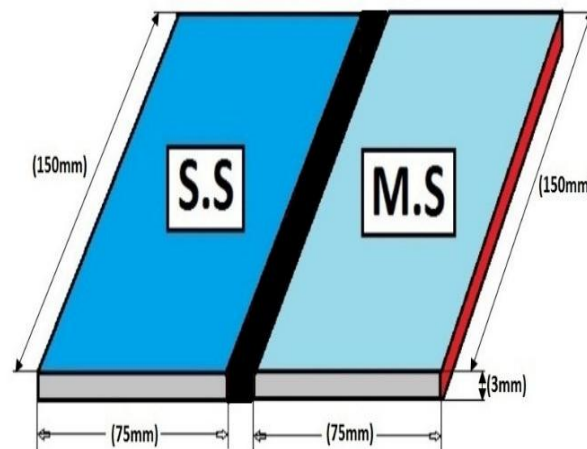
Illustration of the dissimilar plate arrangement for welding
